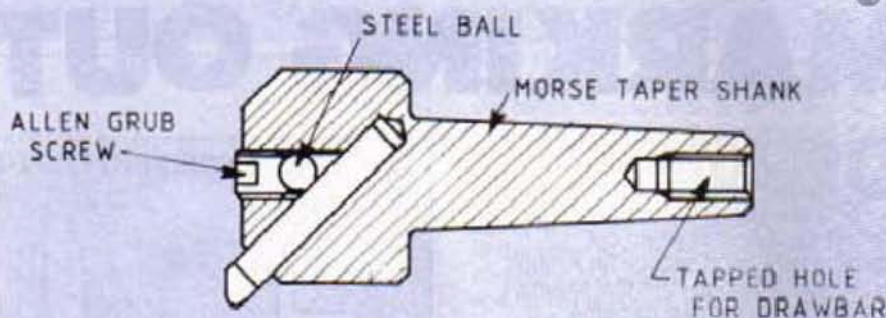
SHOWING THAT THE THRUST ON CUTTER IS AT RIGHT ANGLES TO ITS CENTRE IRRESPECTIVE OF ITS ANGULAR POSITION.
